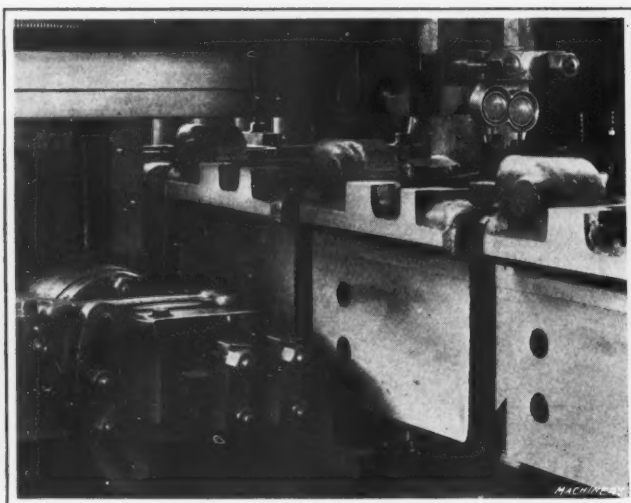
Close-up View of Side-head used for planing the Column Bearing on Milling Machine Knees
